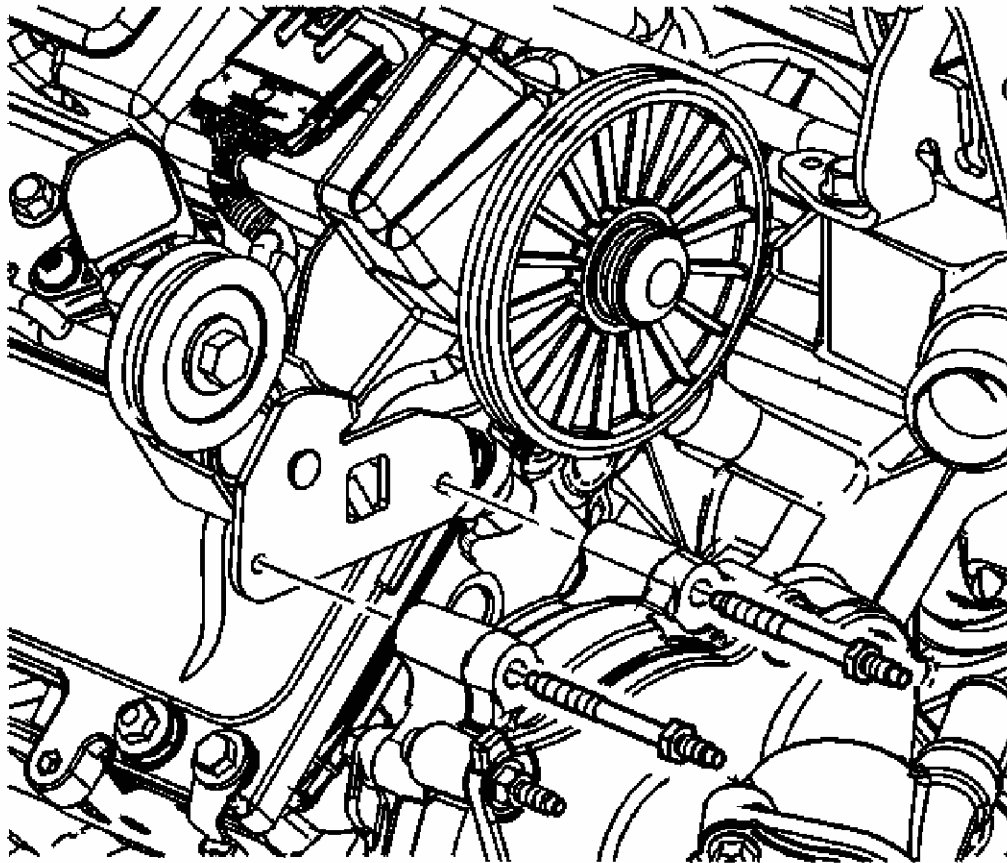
Identifying Water Pump Drive Belt Tensioner
